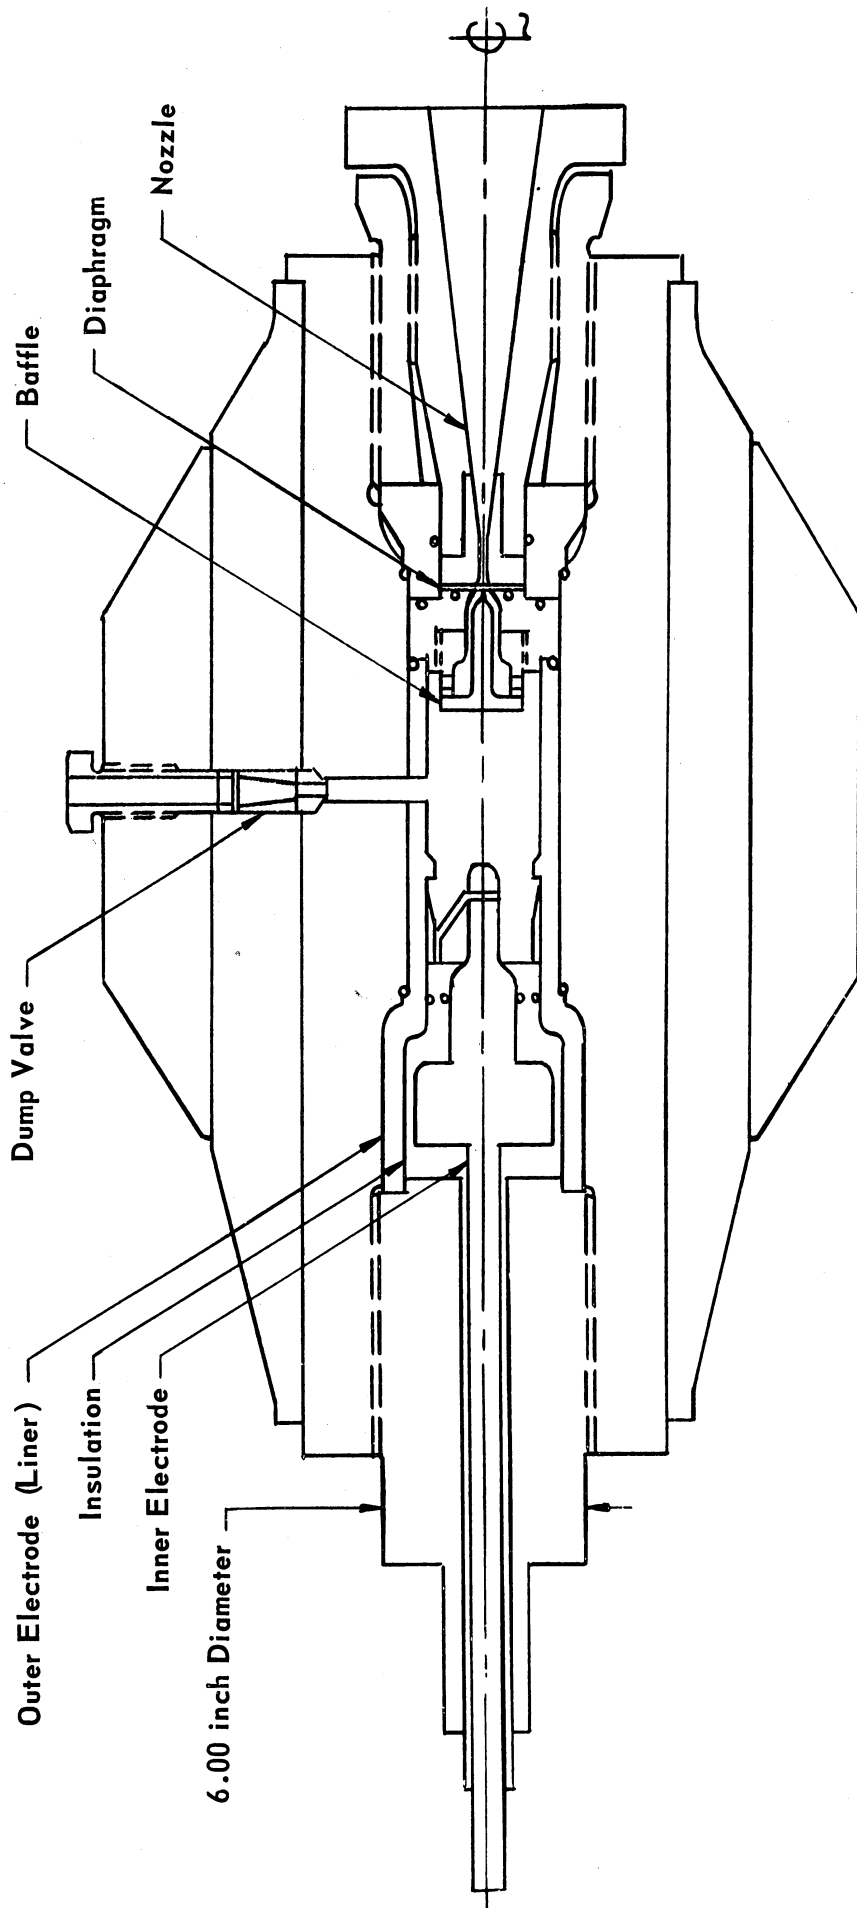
Sketch of the Hotshot Arc Chamber Assembly
